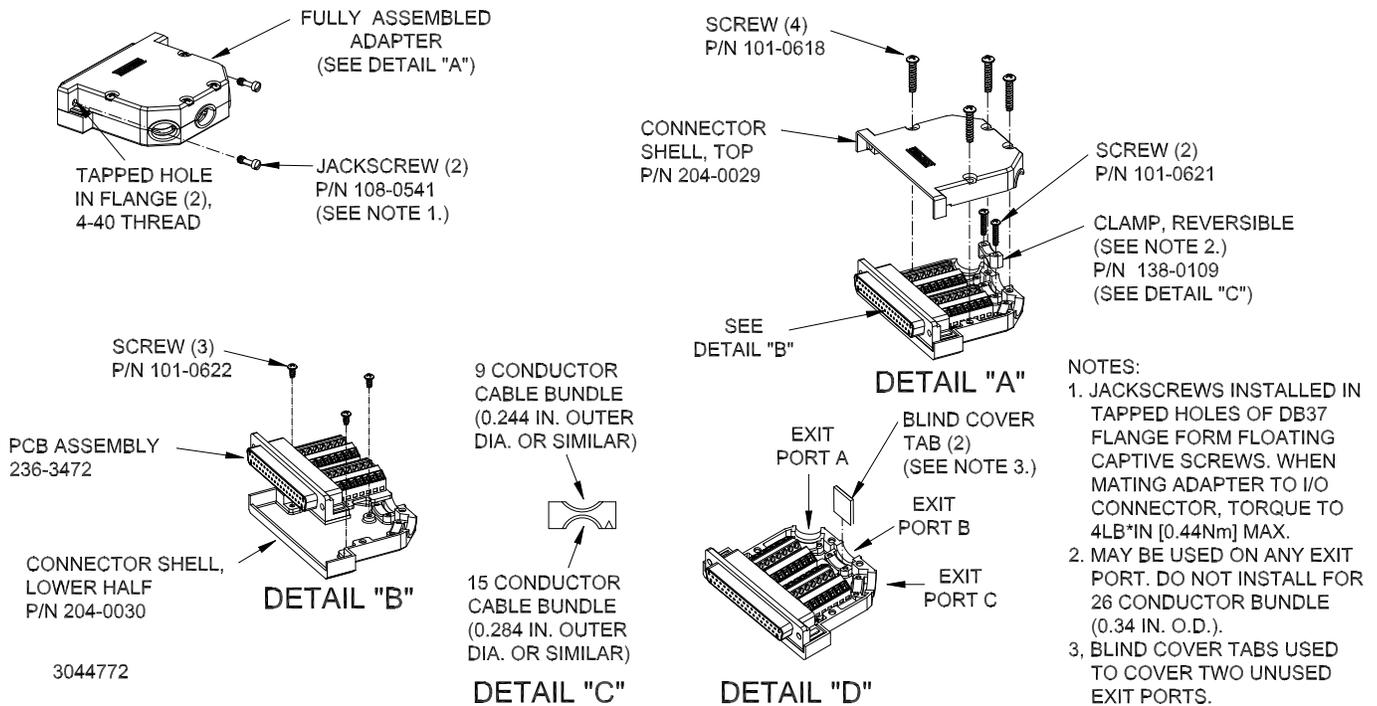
KIT 219-0645 ADAPTER ASSEMBLY COMPONENTS
